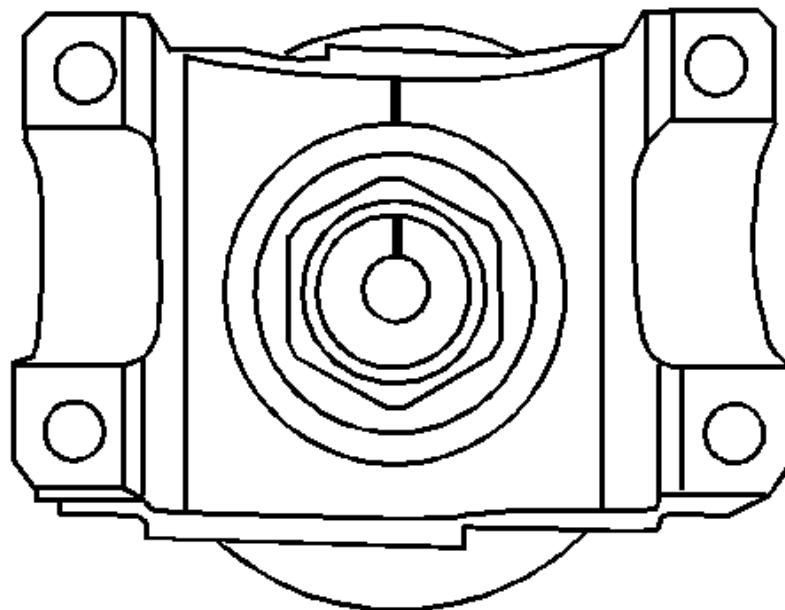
View Of Pinion Shaft & Pinion Yoke Alignment Marks
